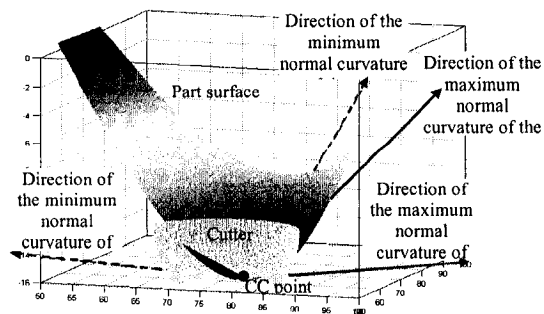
Bull-nose end-mill cuts a part surface at a CC point in 3-axis CNC milling.
